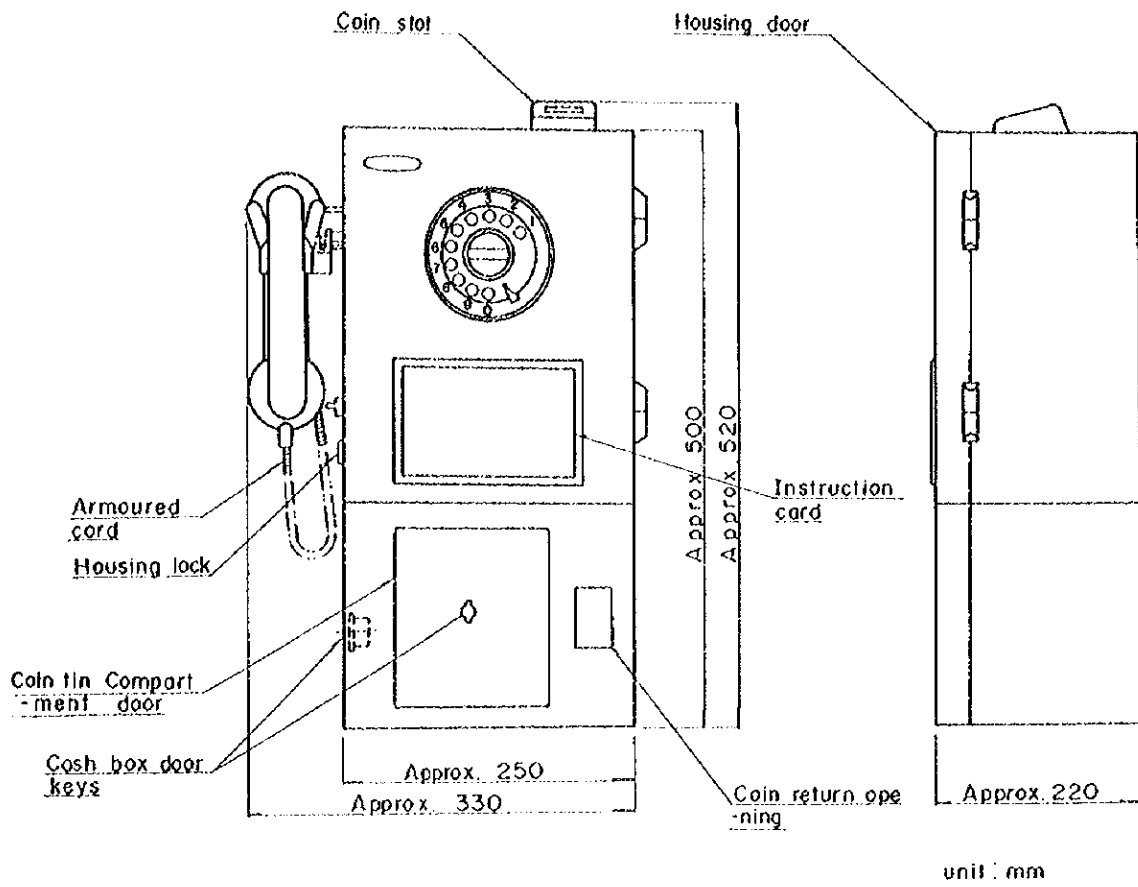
Typical Public Coin Box (Outdoor type)
